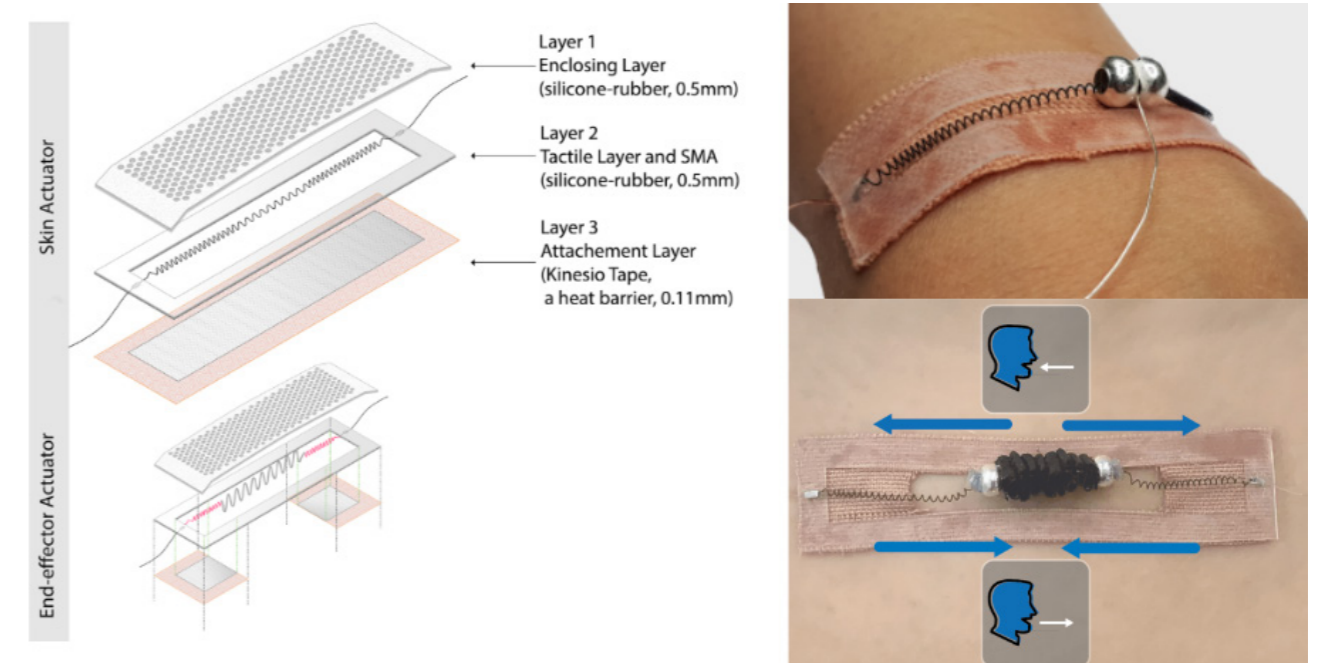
[LEFT] EXPLODED DIAGRAM EXPLAINING THE MULTI-LAYER STICKER STRUCTURE OF SPRINGLETS; [RIGHT] TWO EXAMPLE IMAGES OF PHYSICAL SPRINGLET PROTOTYPES IN USE WITHOUT THE ENCLOSING LAYER (HAMDAN ET AL., 2019)
